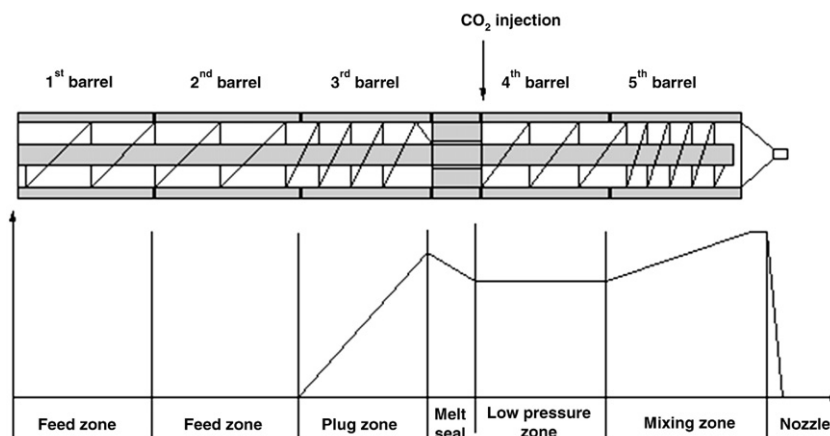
A schematic drawing of the extruder divided into several sections with a pressure profile.
